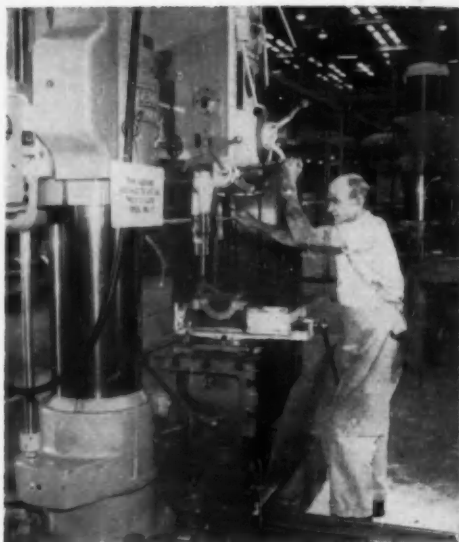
Two previously drilled and tapped holes are reamed to 0.750 in. for locating on future tools. This is a five-foot Fosdick radial arm drill.
